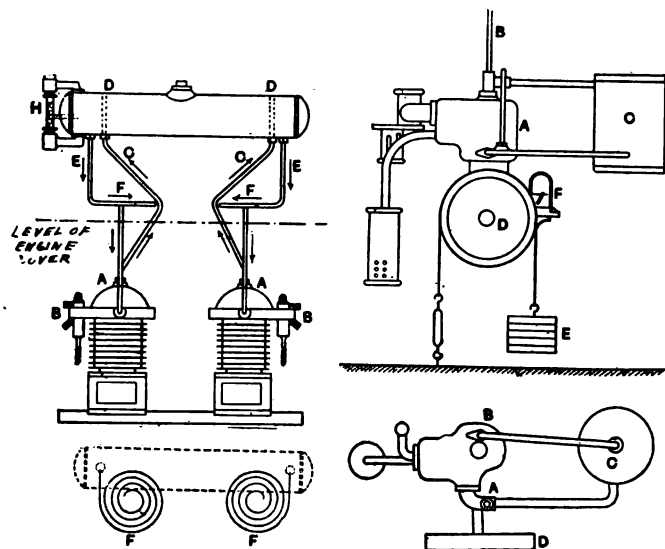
ELEVATION AND PLAN. FIG. 2.—ELEVATION AND PLAN.
